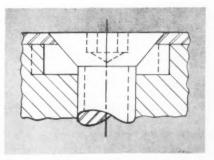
This sketch shows a very thin piece assembled to a casting. In this case, both pieces were drilled separately with the casting being counterbored to allow for minor discrepancies in scale measurements.
